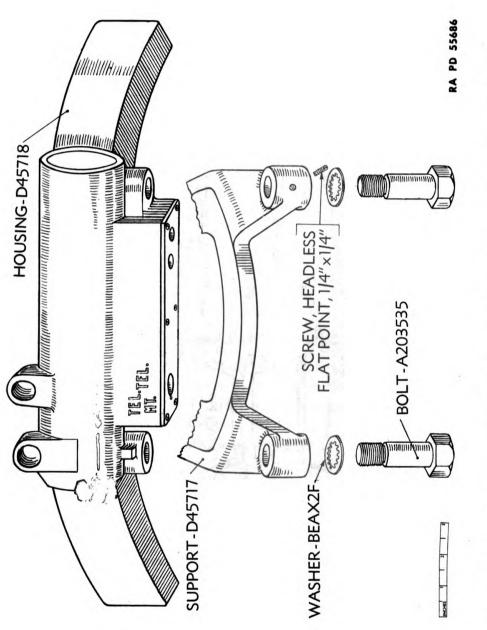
Deflection Worm Housing and Support Assembly—Exploded View
